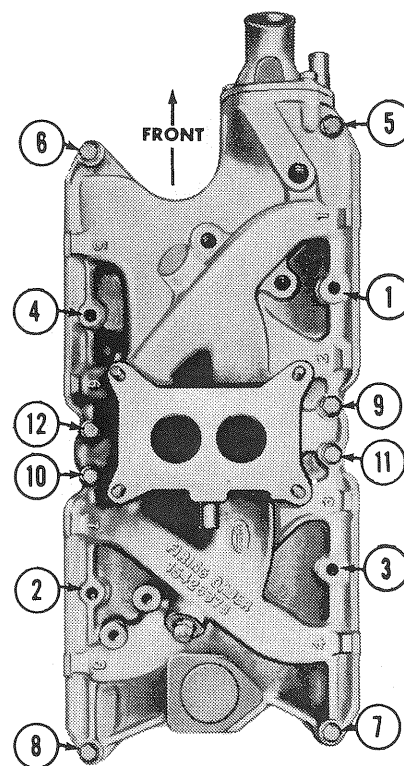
Intake Manifold Bolts Tightening Sequence — 302 CID Engine
